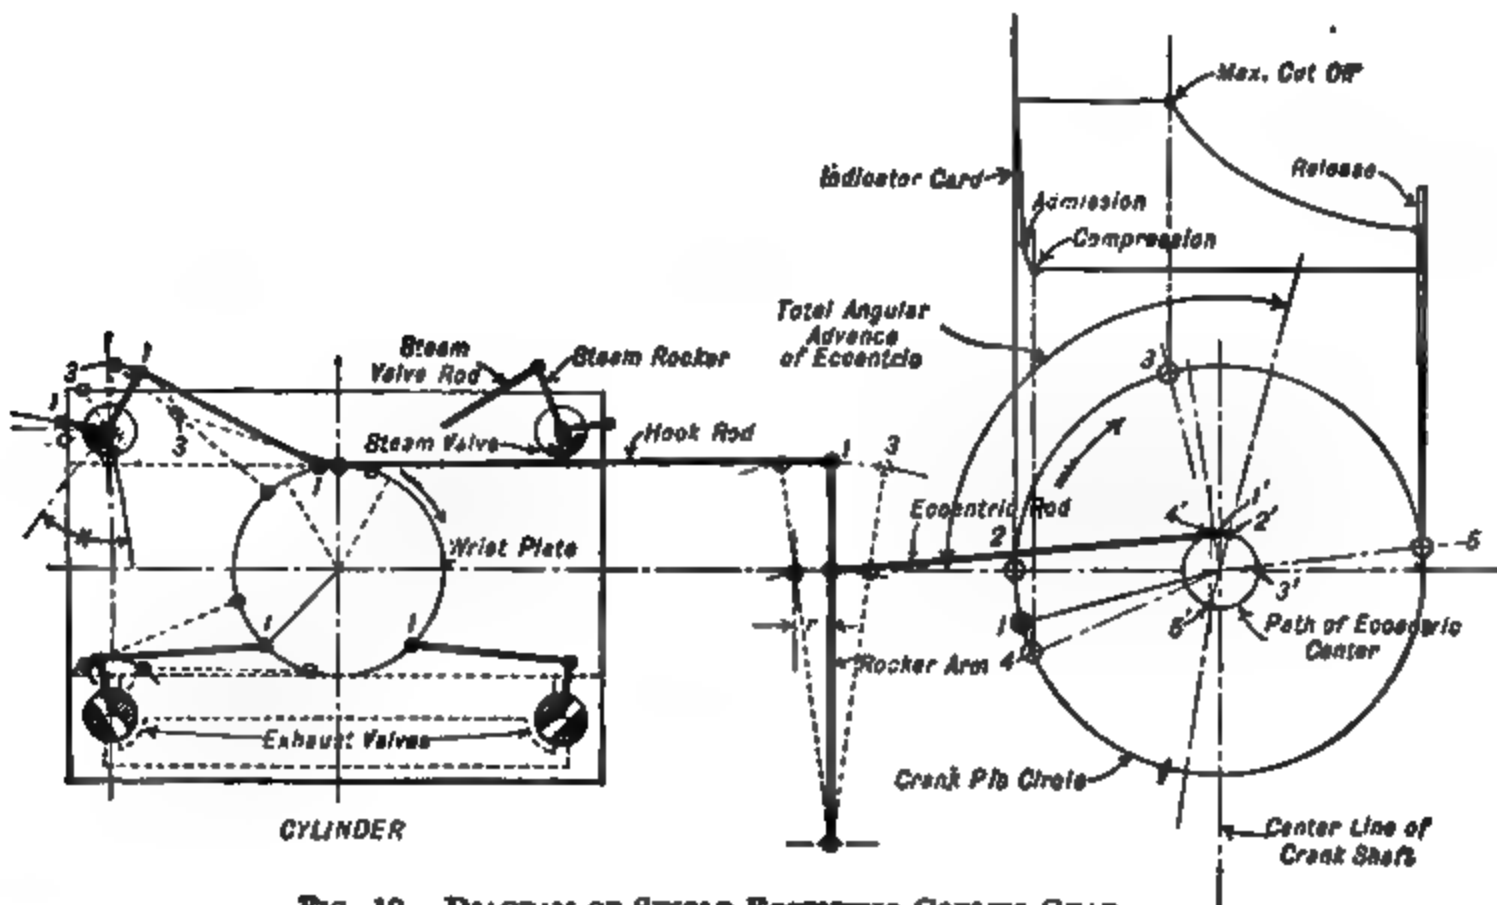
DIAGRAM OF SINGLE ECCENTRIC CORLISS GEAR.
